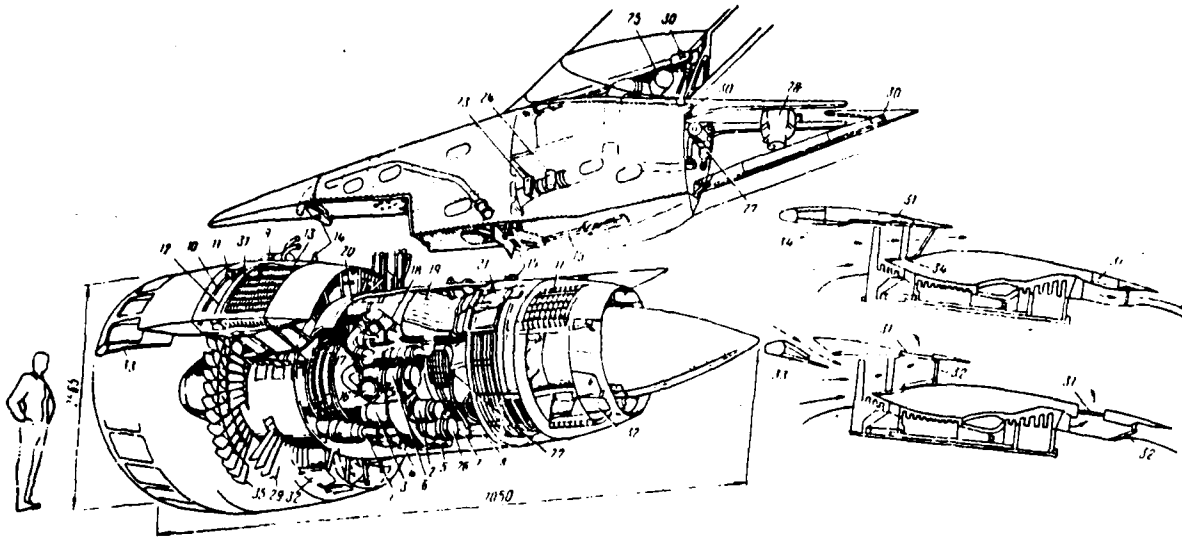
Layout TRDD of Pratt-uitin JT9D and the schematic of the work of the reversers of thrust and intake shutters/doors (aircraft of Boeing-747): 1 - drive shaft of auxiliary units; 2 - coaxial constant-speed drive; 3 - generator with a power of 60 kV·A, 4 - pump and the control unit; 5 - centrifuge; 6 - oil tank; 7 - drive of the reverser of the thrust of gas generator; 8 - cable run to the reverser; 9 - compressed air motor of the drive of the reverser of the thrust of fan; 10 - flexible drive shaft; 11 - gearbox and jack; 12 - moving ring; 13 - roller slide; 14 - unit of engine mount; 15 - component/link, which receives thrust; 16 - air bleeding; 17 - check valve of selection from 8th step/stage; 18 - cutoff the valve of selection from the 15th step/stage; 19 - primary heat exchanger; 20 - air from the fan to the heat exchanger, 21 - bleeder of air from the fan; 22 - valve of depressurizing; 23 - block of the temperature
